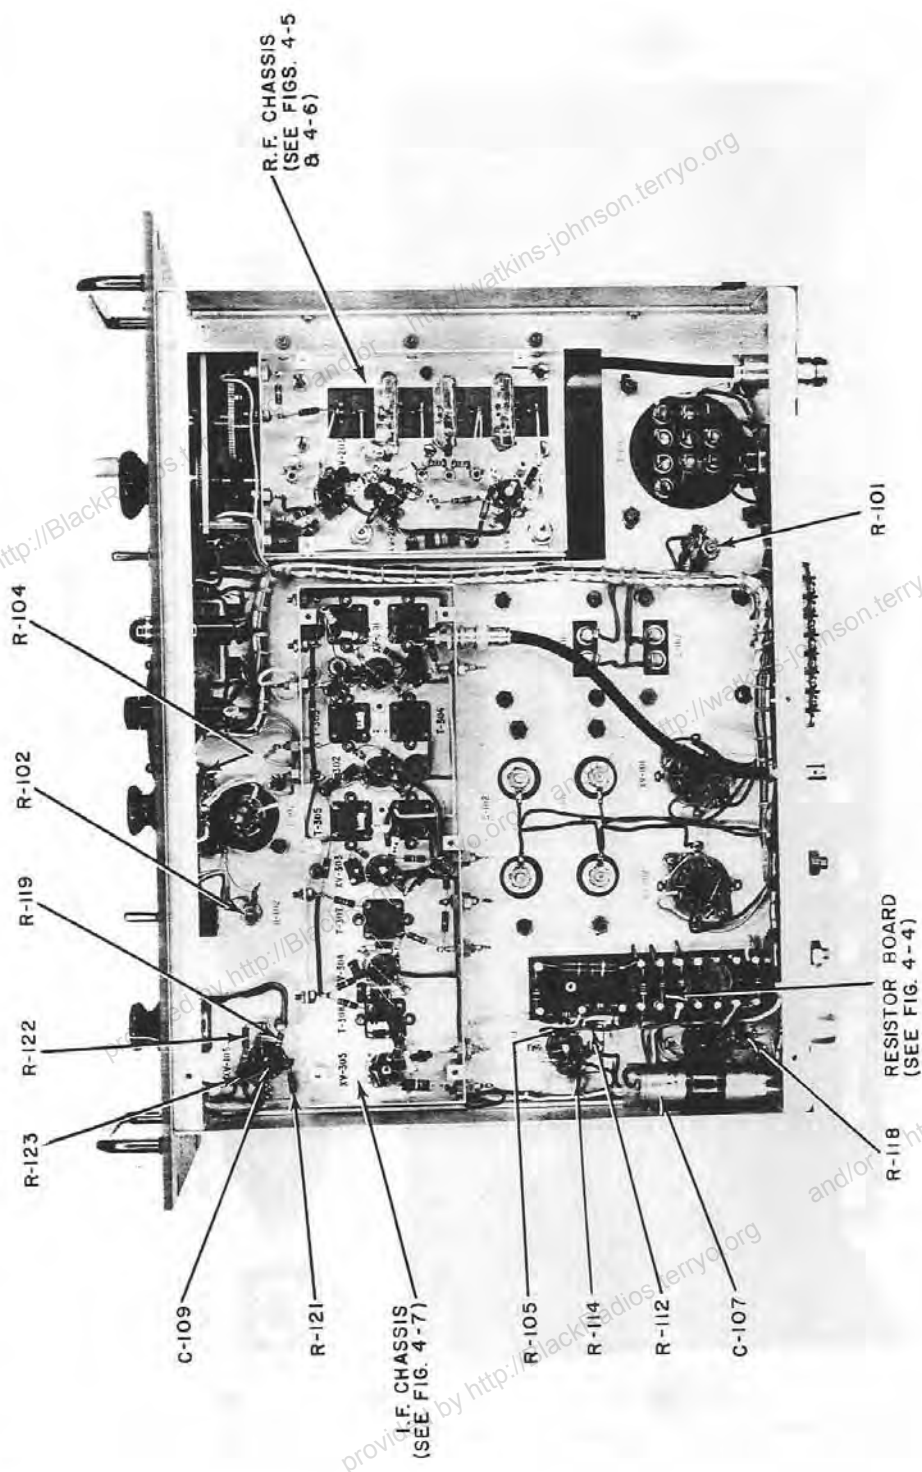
Model 1670 Special Purpose Receiver, Bottom View (Dust cover removed)
